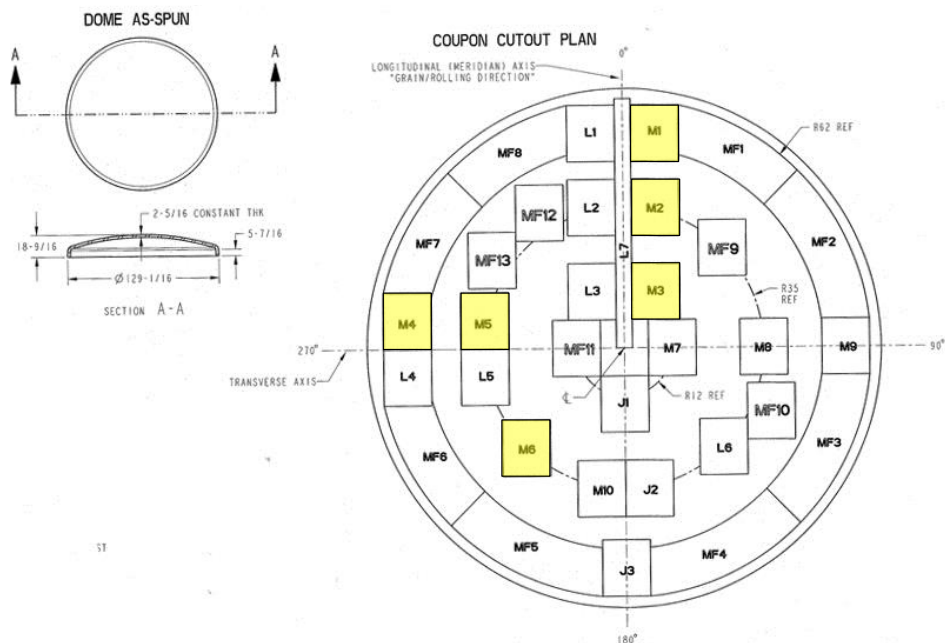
Aft bulkhead cut plan showing the location of the fracture toughness test coupon blanks highlighted in yellow.
